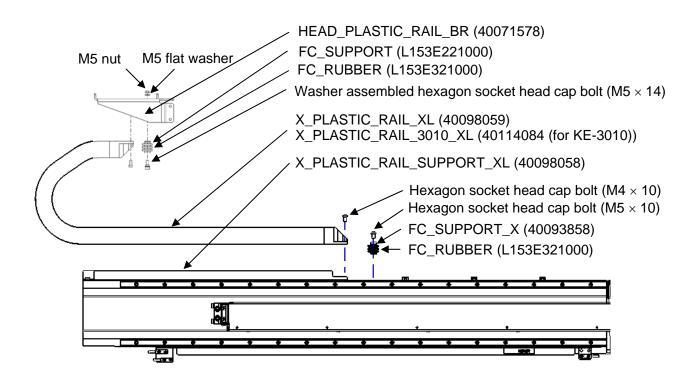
X-Axis Cableveyor (XL Board Specifications)
